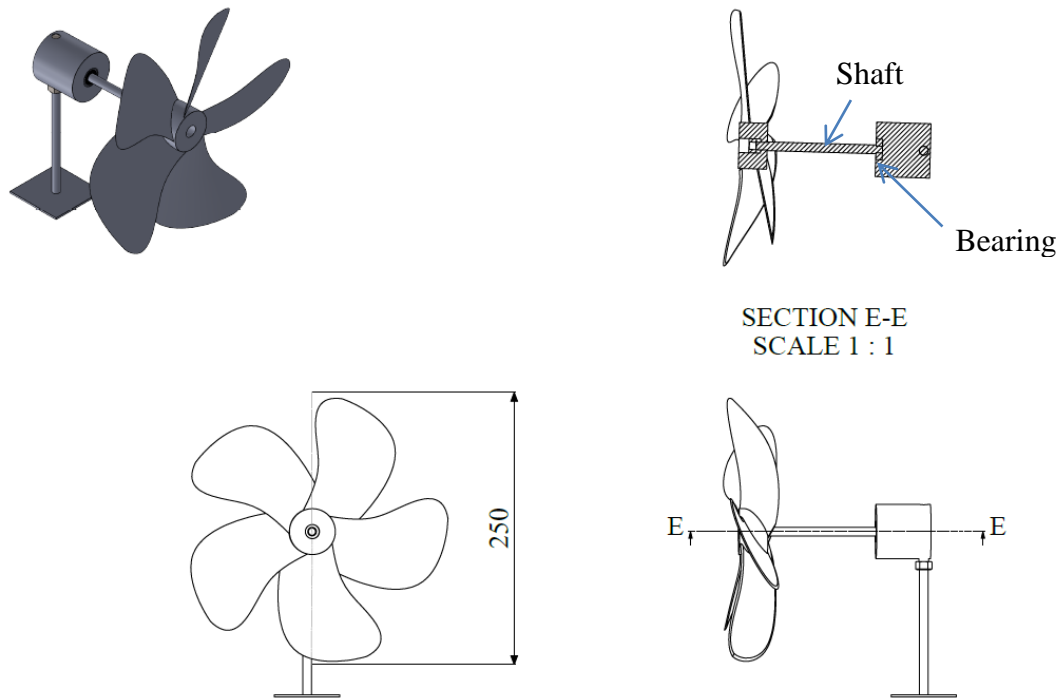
Assembly drawing of the passive free-rotating air mixing blades (all dimensions are in mm).
